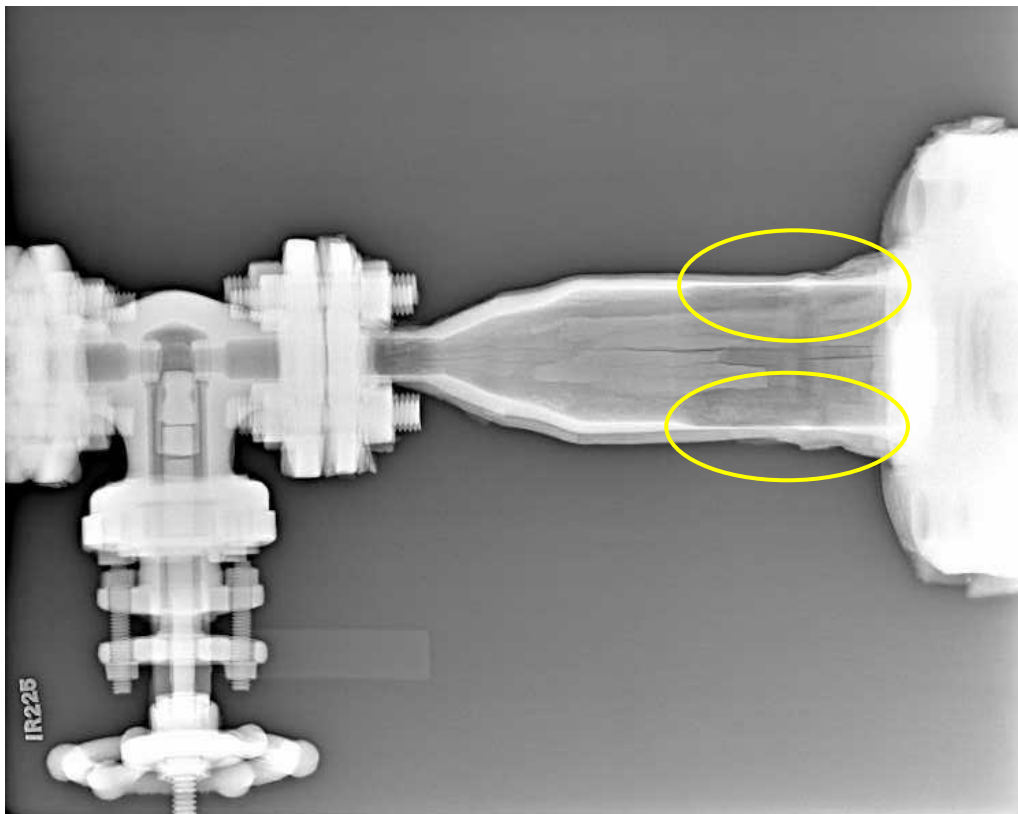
CR image of a pipe assembly including a valve, reducer section and a short length of 2" pipe. The reducer pipe section has heavy external corrosion and the radiograph clearly shows very little remaining wall thickness in the areas highlighted.
